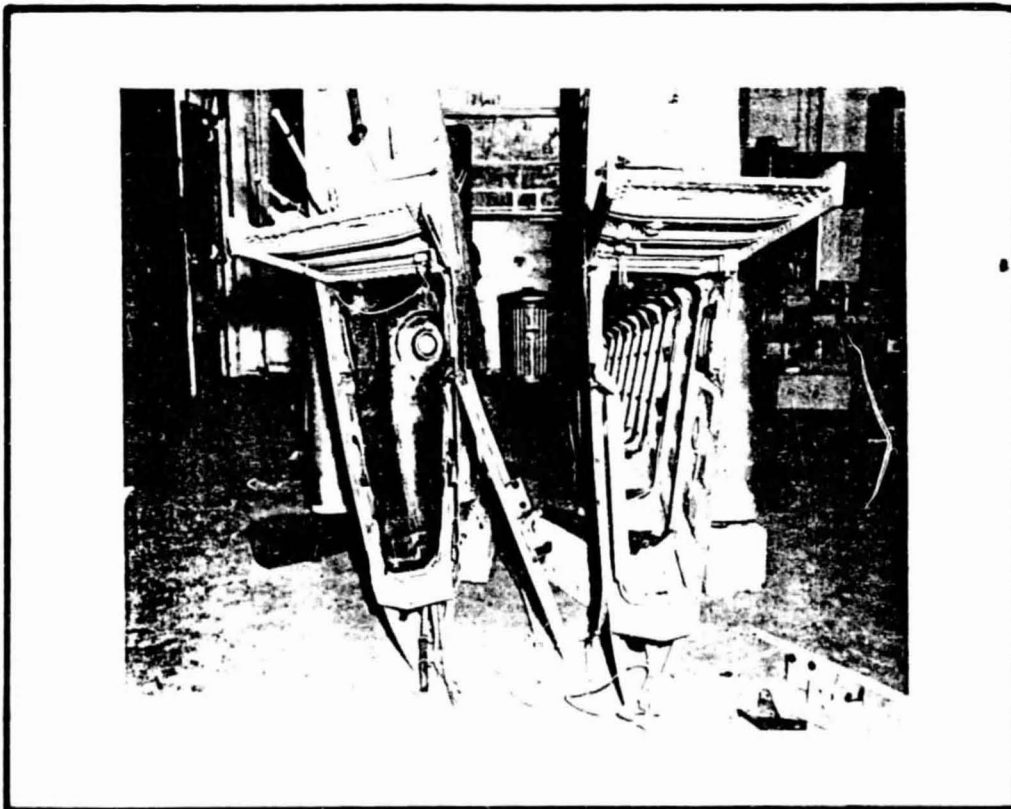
Modified Fuel Tank Installed in Wing.
